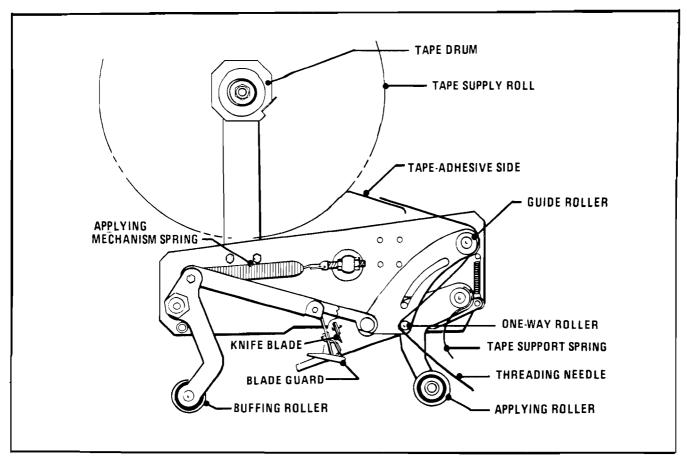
TAPE THREADING DIAGRAM - TOP TAPING HEAD - LEFT SIDE VIEW
